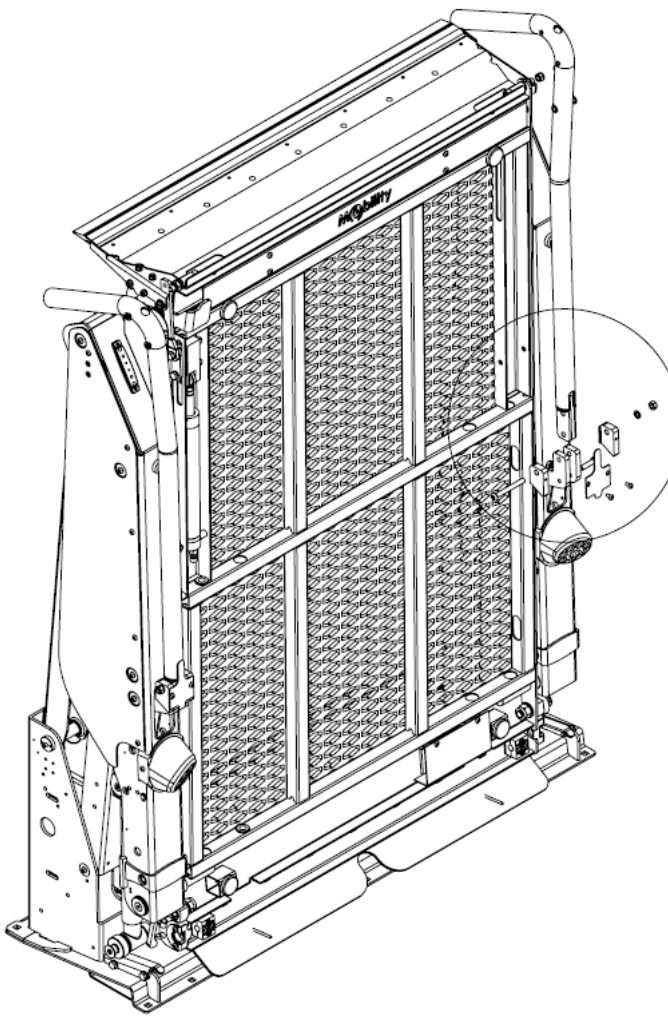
Towers angled outwards: Slacken the bolts and add packing under the base around the outer fastenings, working inwards with thinner packing until the towers are perpendicular to the base. Once adjustment is completed, tighten to correct torque.
